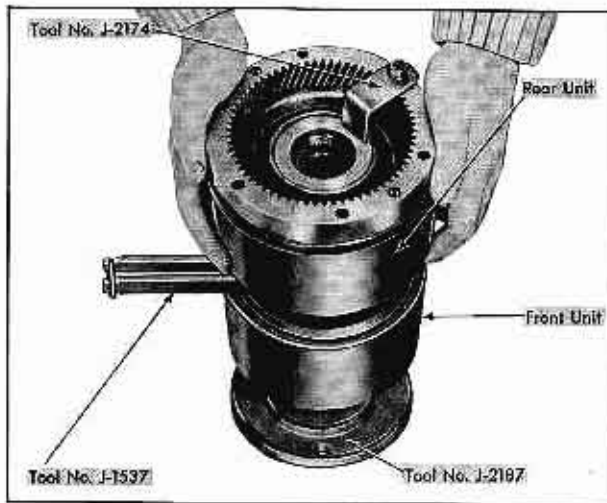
Installing Rear Unit Assembly on Intermediate Shaft.
